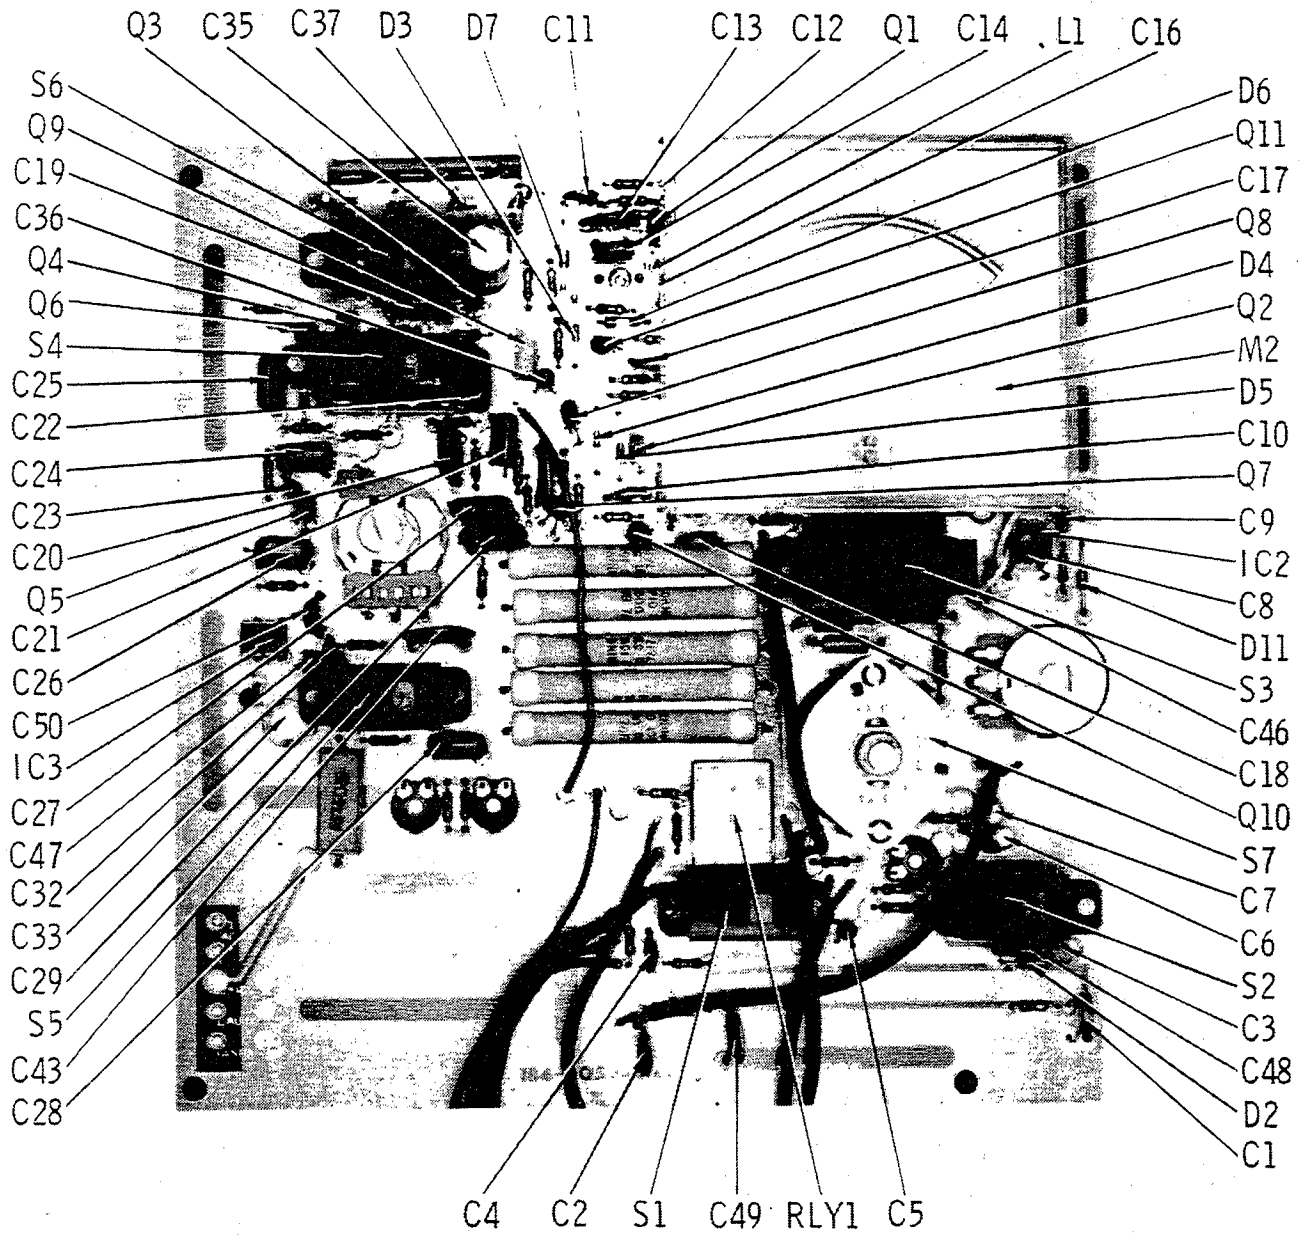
RF Printed Circuit Board, Top View, Parts Location.
